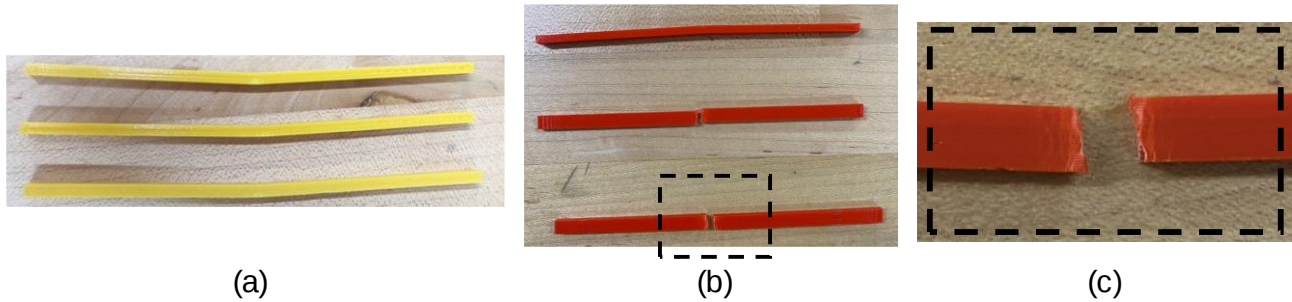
(a) 3D printed specimens experiencing bending only, (b) 3D printed specimens experiencing fracture, (c) Zoom view of the fracture specimen indicating brittle fracture
